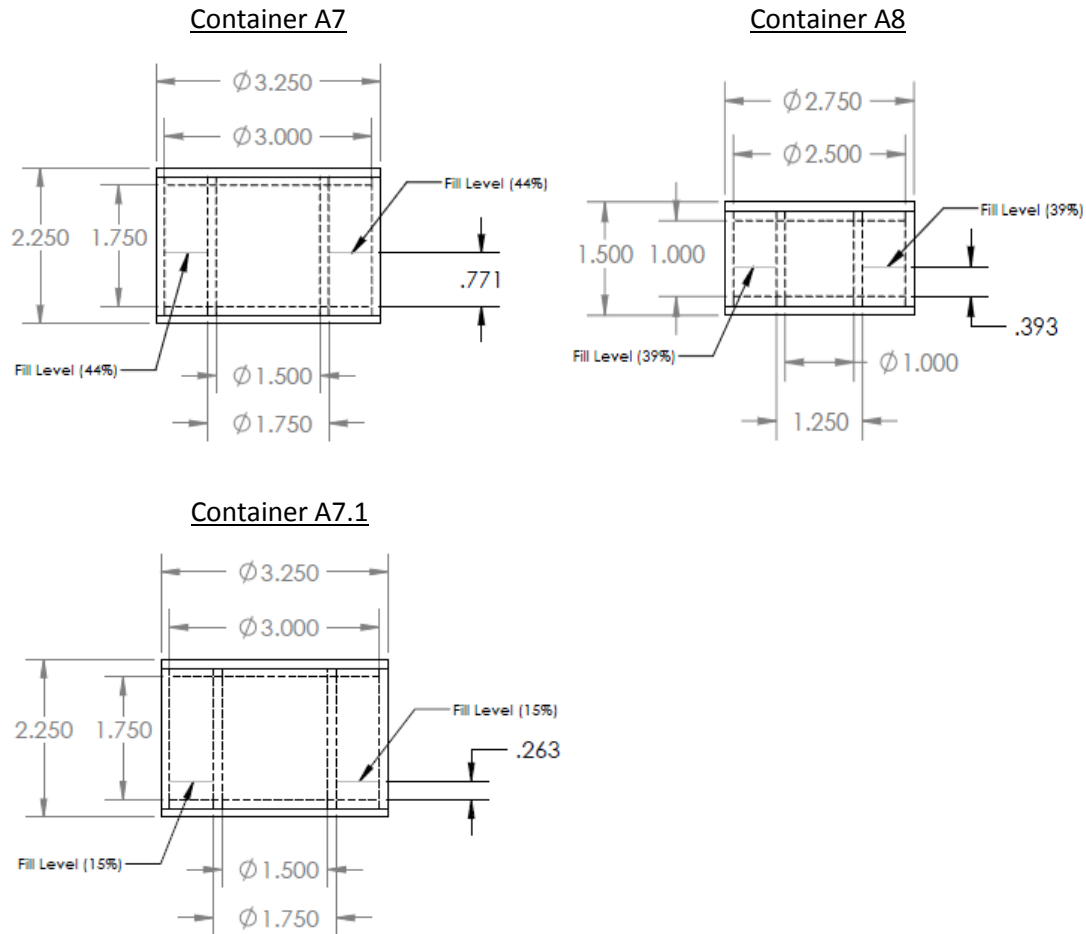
Container A7, A7.1, and A8 Drawings, Dimensions, and Fill Levels
